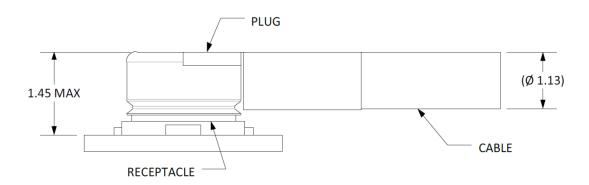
Connection between RF Connector and Mating Plug Using Ø1.13mm Coaxial Cable
